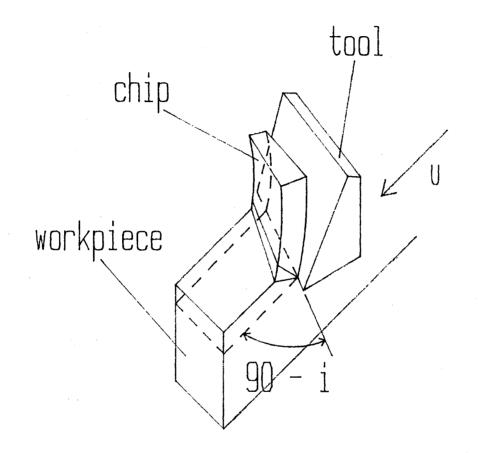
A Divided Oblique Cutting Element in the Cutting Edges in Drilling
